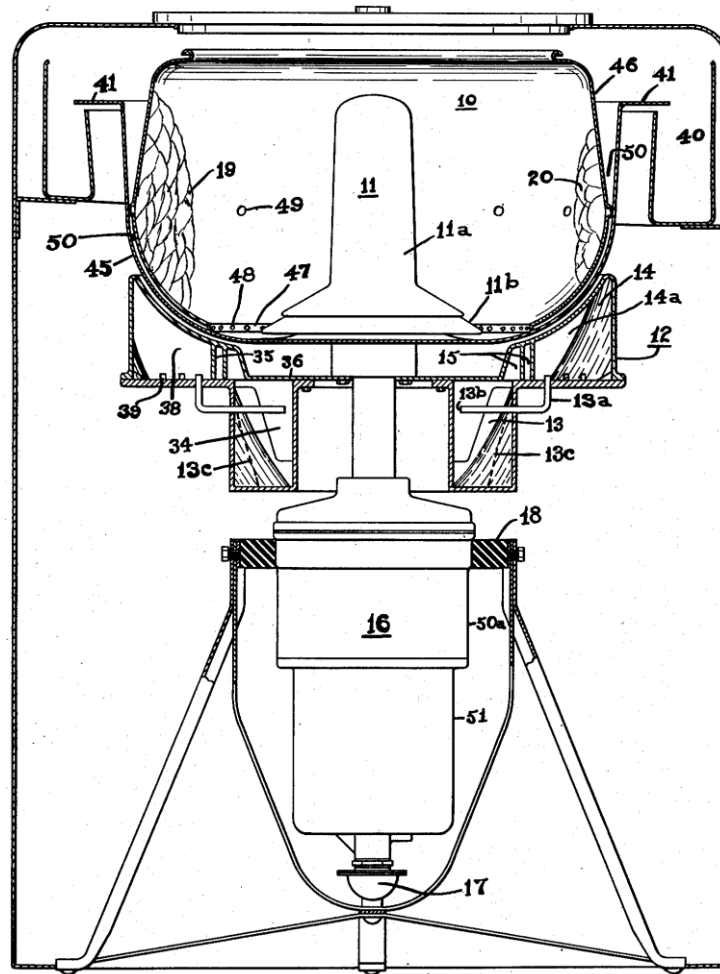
Liquid balance ring in a washing machine, from Dyer [2].
